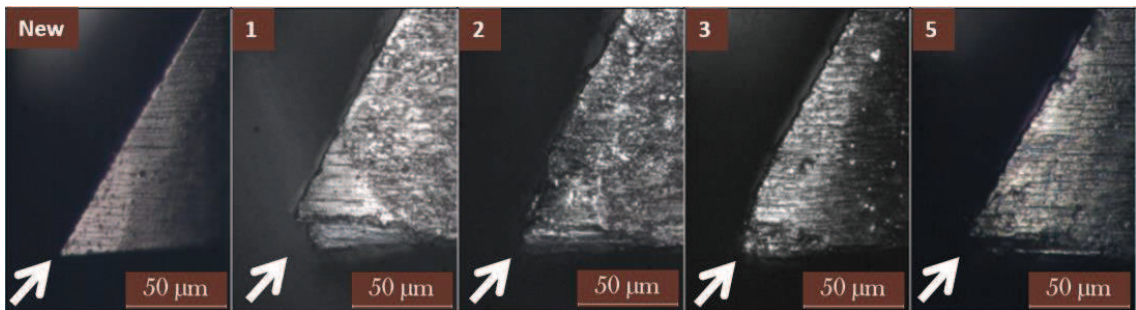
Flank wear for dry test under machining conditions 1,2,3, and 5.
